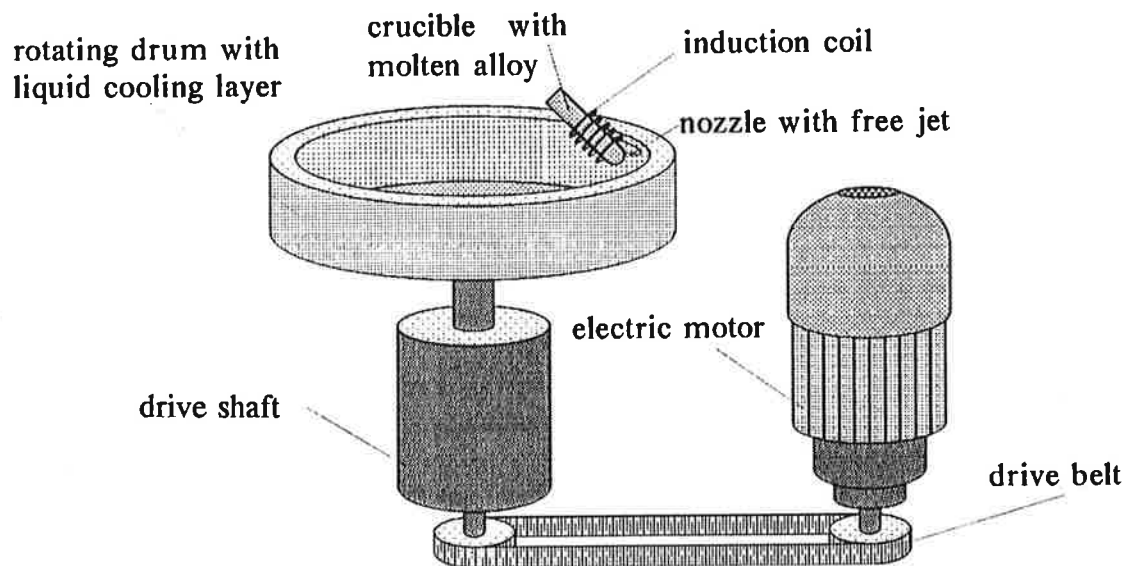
Schematic drawing of the in-rotating-liquid spinning equipment set-up. The casting drum is horizontally attached to the drive shaft. The free jet emerging from the nozzle is quenched and conveyed by the rotating coolant.
